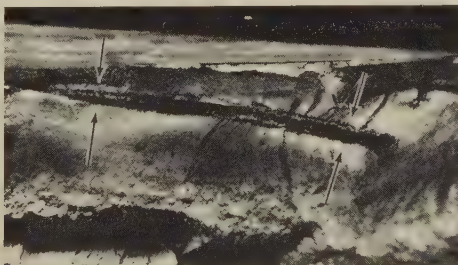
Crack origin in the weld-related catastrophic fracture of a 260-in.-diam solid-propellant rocket motor case made of 18% Ni, grade 250, maraging steel
